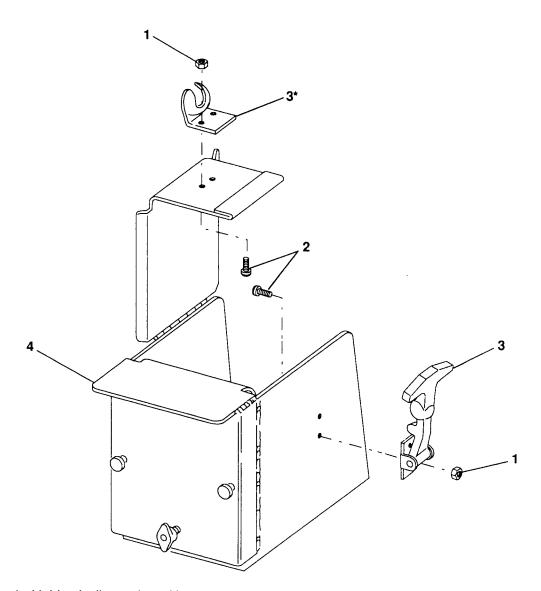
Carriage Assembly 6650434 and Stop Assembly, Depression, 6650651
